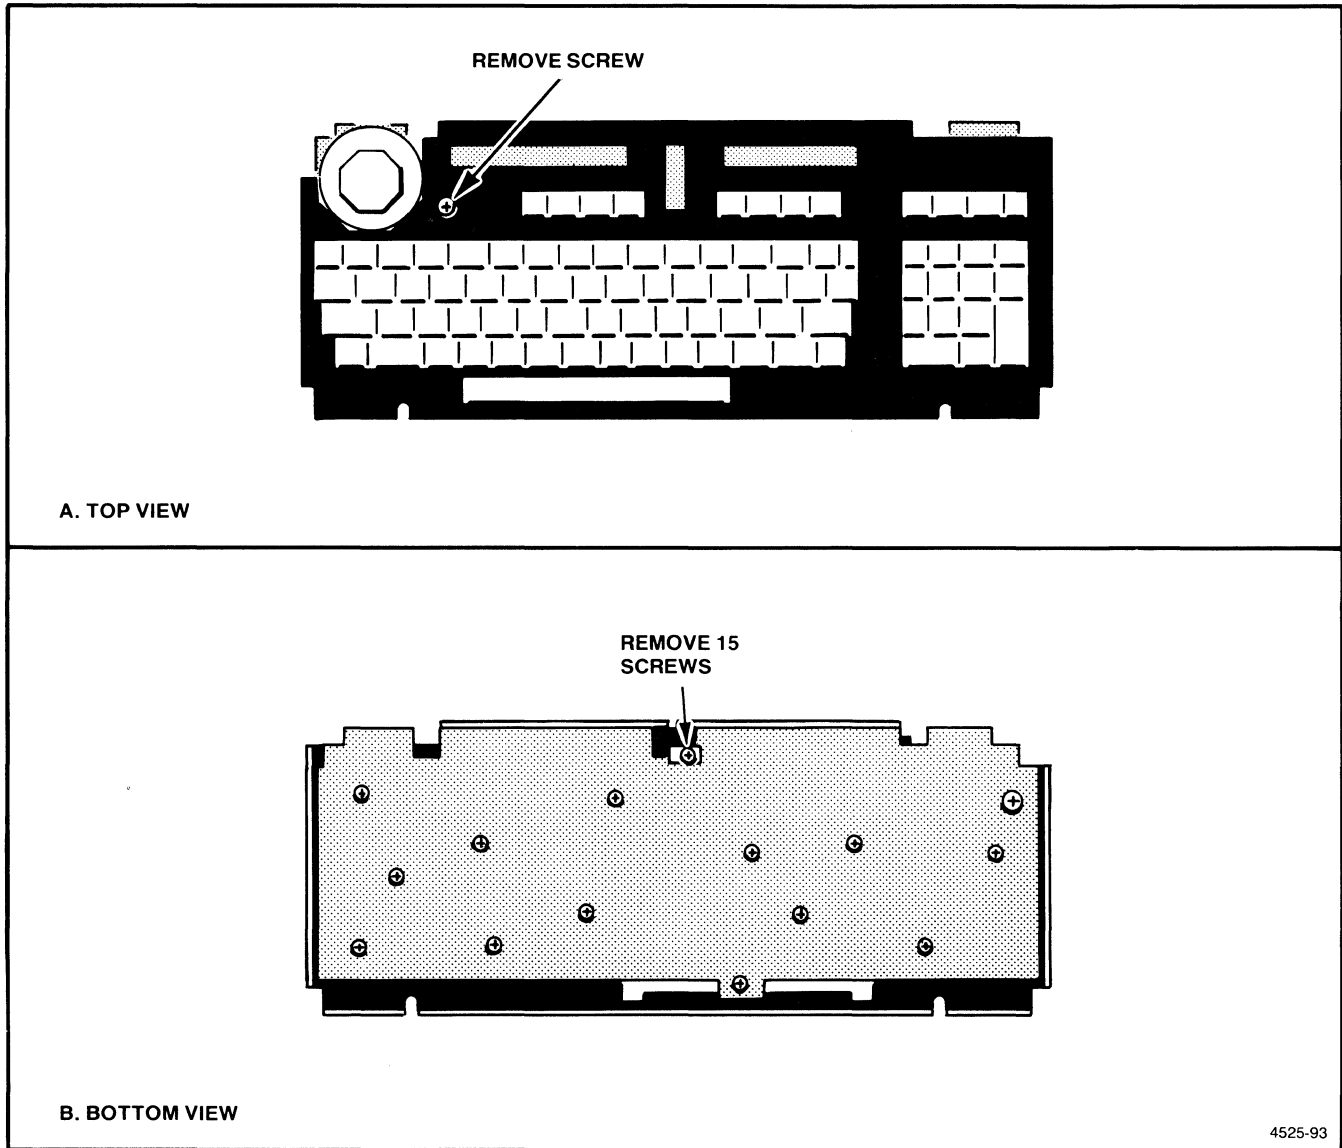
Keyboard Circuit Board Mounting Screws.
